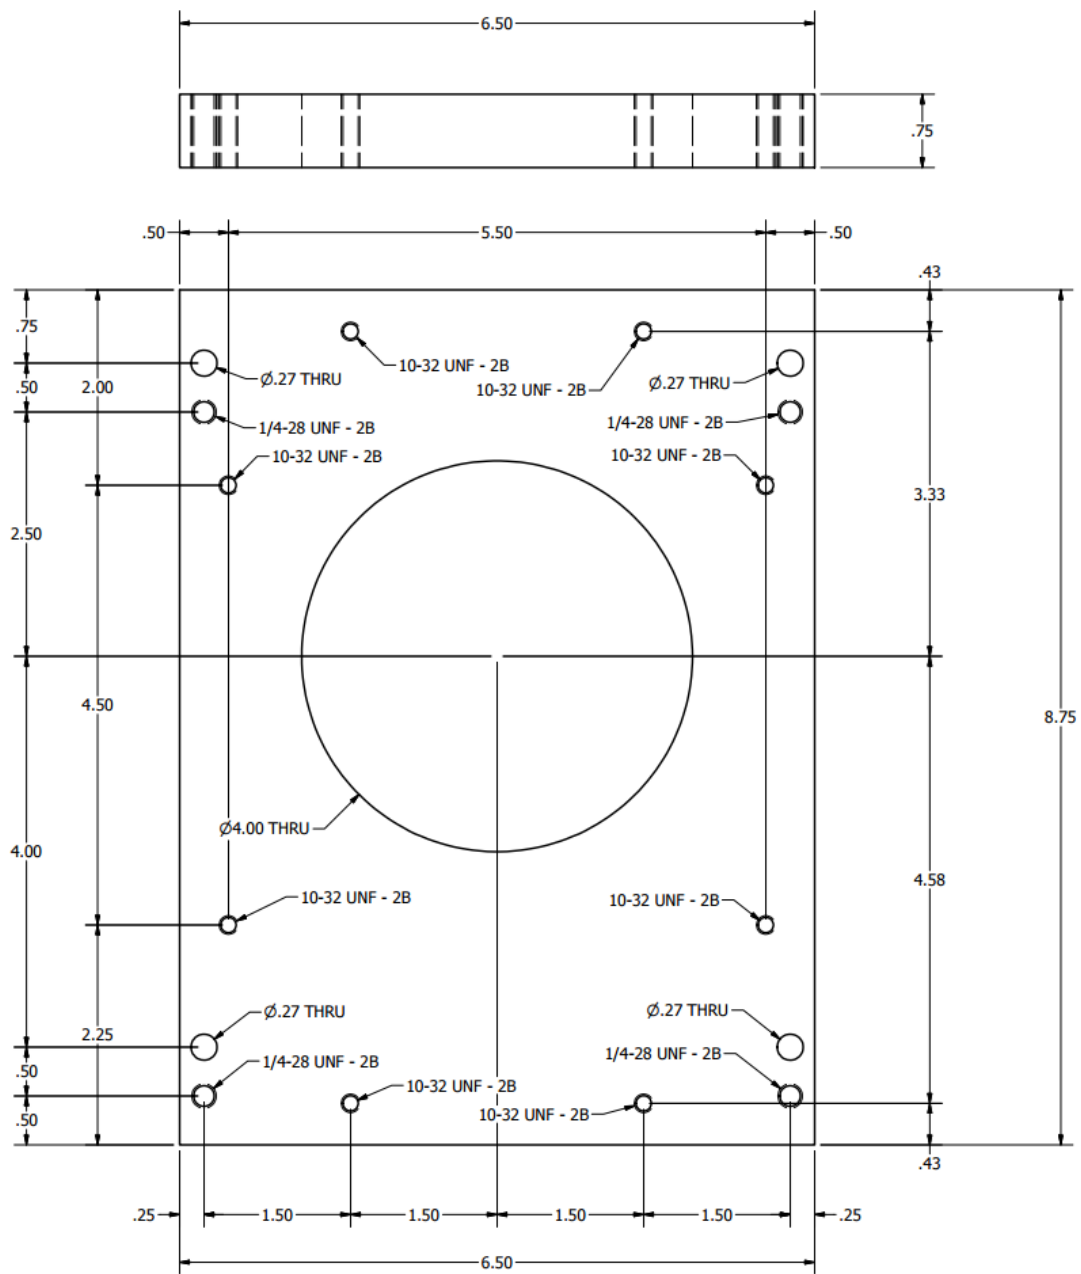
Extraction Plate Assembly - Adjustable Base
